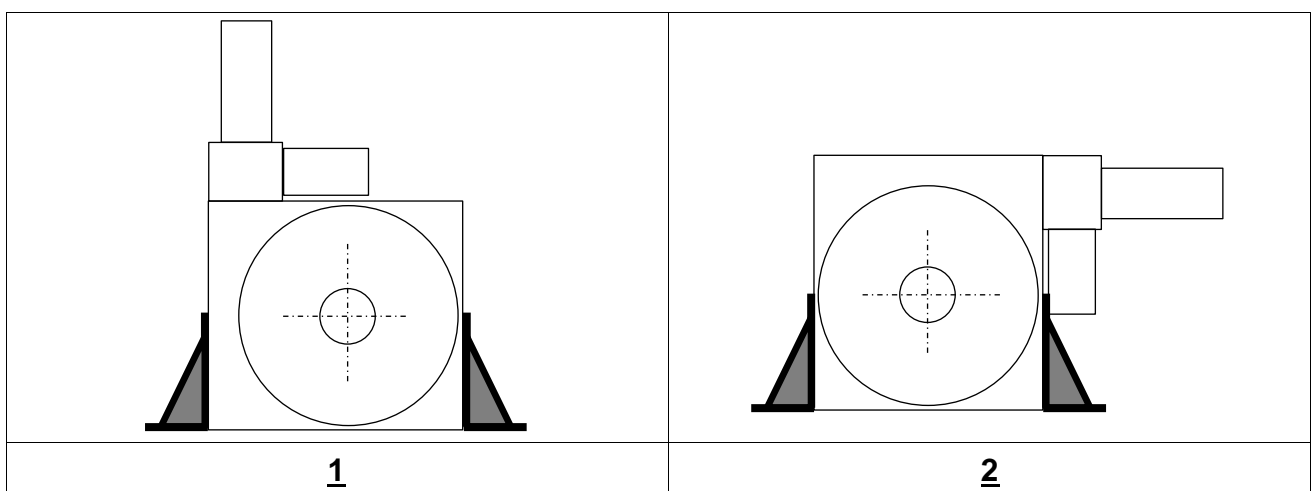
Foot Bearing passive friction SIGUREN UNIT®
